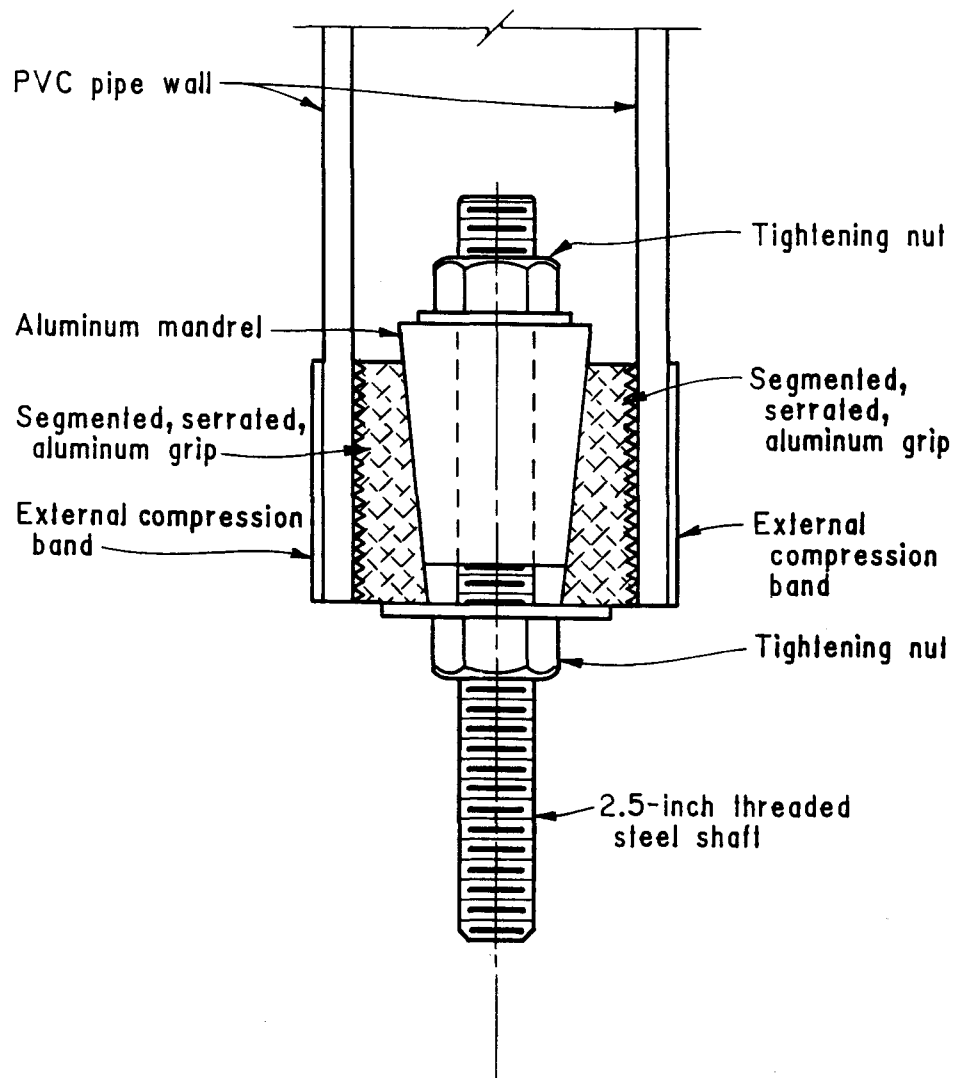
Special tensile grips were designed and fabricated for full-scale testing of 8- and 12-inch-diameter specimens.
